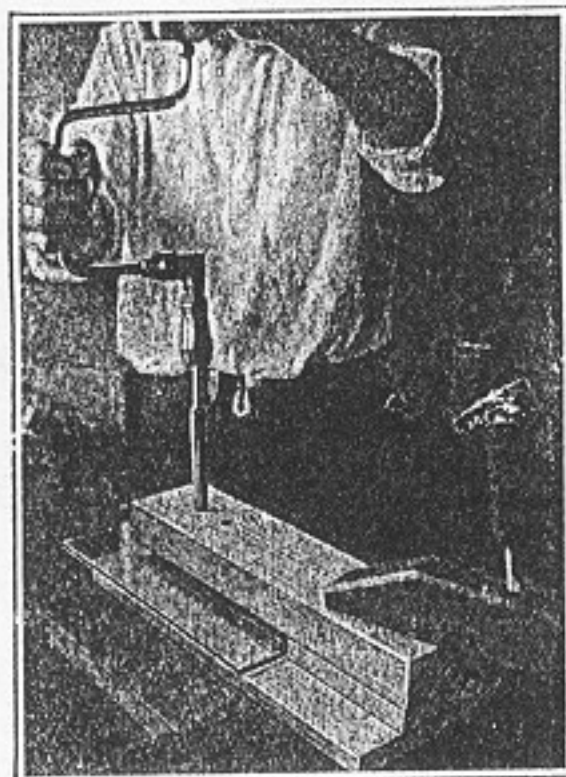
Grinding a hole in plate glass with a brass tube charged with abrasive powder.
